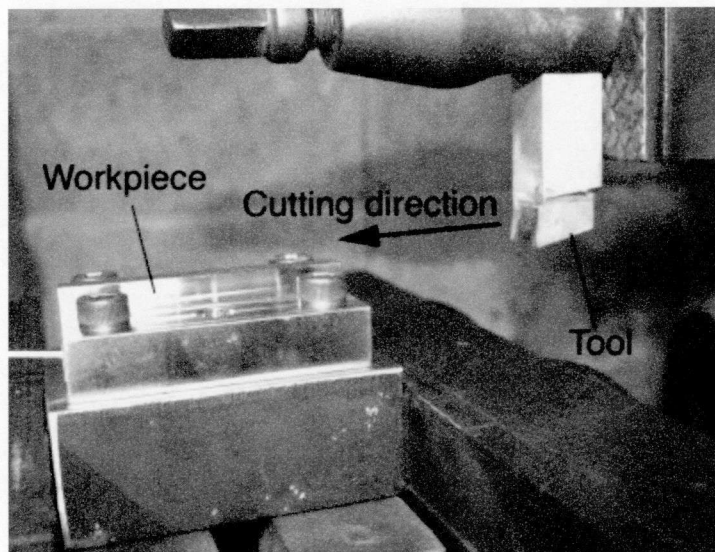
Photograph of shaper machine assuming two-dimensional cutting.
